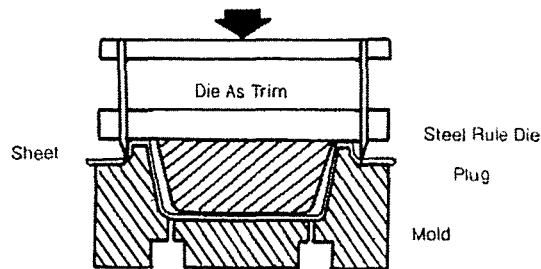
In-Situ Trimming Die Lowered to Cut Formed Part [2]
